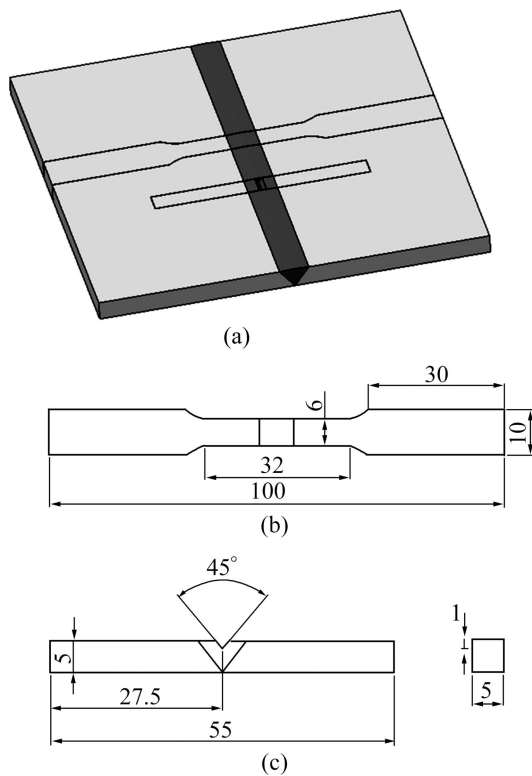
Schematic illustration of welded plate and location of specimens extracted for mechanical testing (a), and configuration of tensile (b) and impact test specimens (c), respectively (unit: mm)
